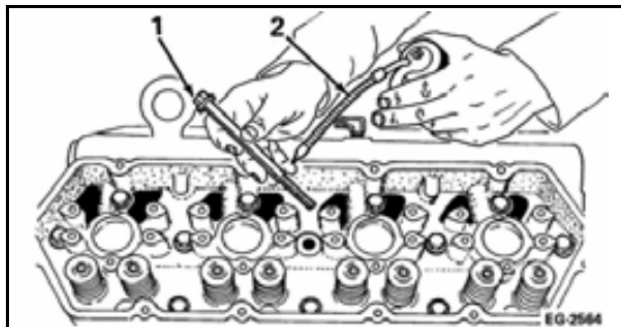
Lubricating the Cylinder Head Mounting Bolts
